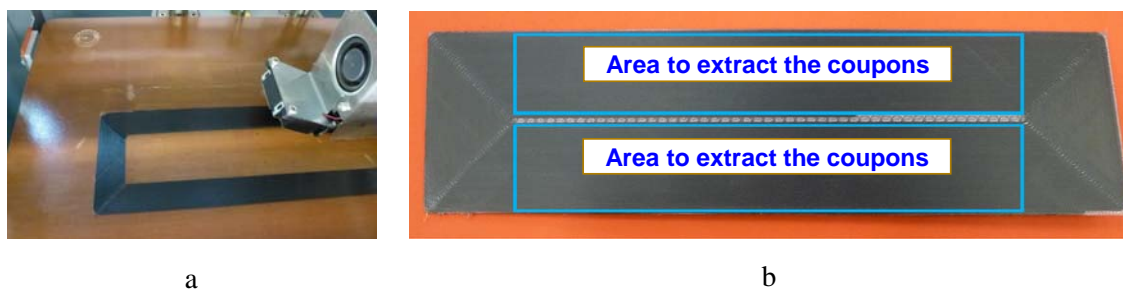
a) Carbon fibre printing, b) Zones of the carbon fibre panel to extract the coupons.
